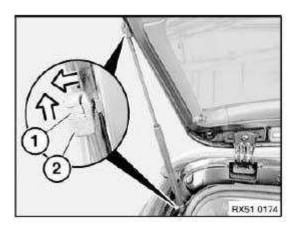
Removing Gas Strut From Holder Courtesy of BMW OF NORTH AMERICA, INC.
